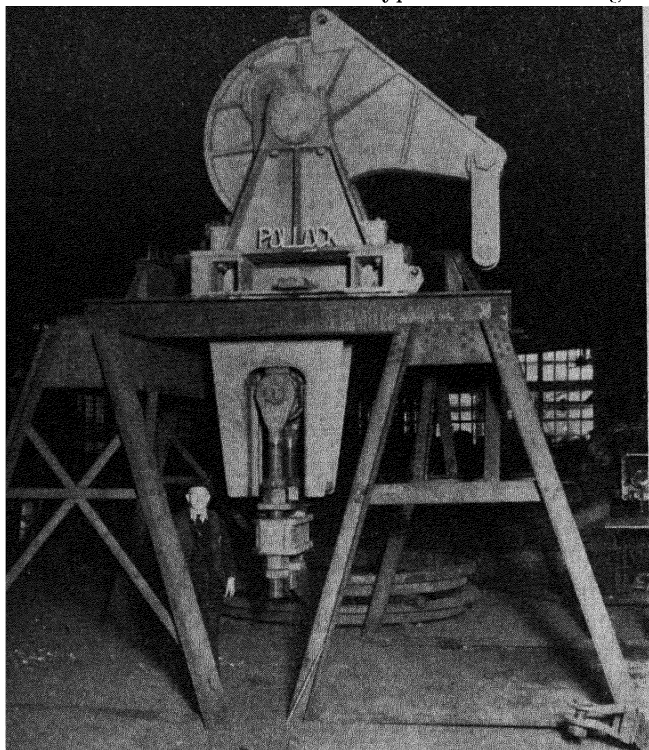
Welded bell-operating rigging for 1,000-ton furnace. (Courtesy of The William B. Pollock Co.)
